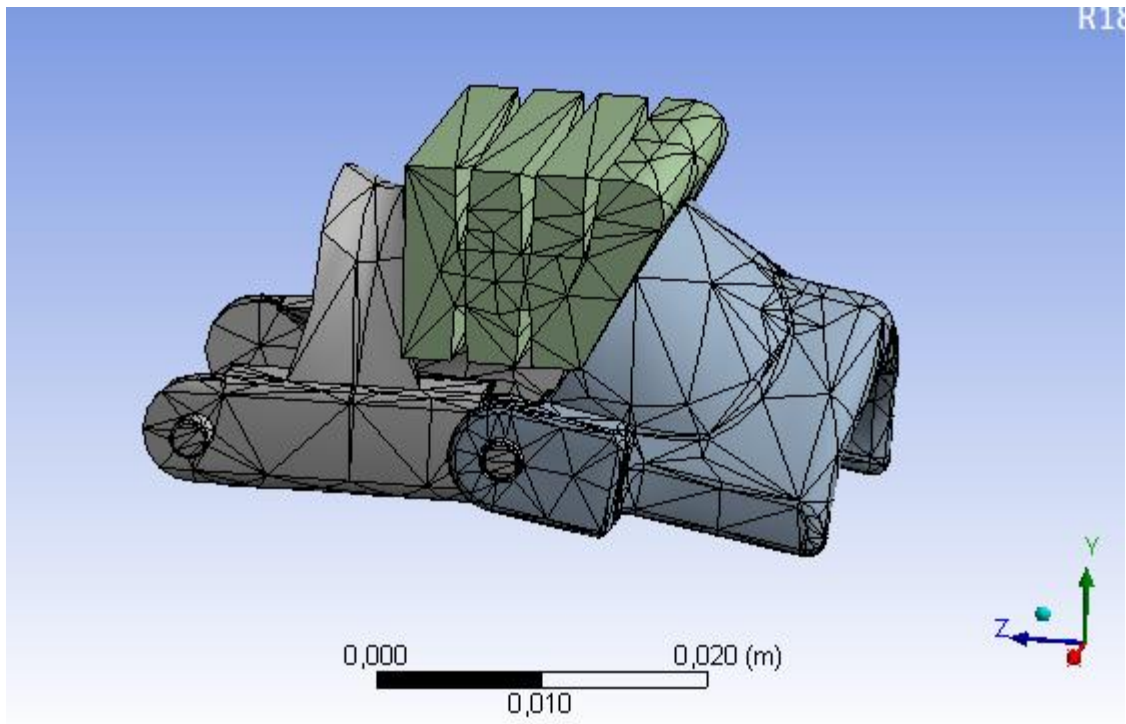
The FEA mesh model of the HE frame-actuator assembly of MP-DIP joint actuator-DP.
